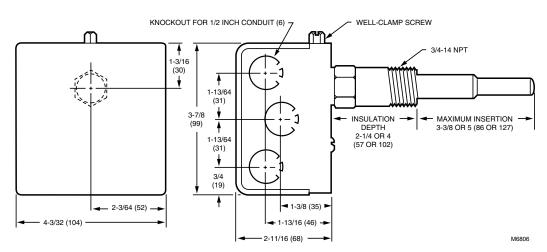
L4103A,B,C mounting dimensions in in. (mm).
